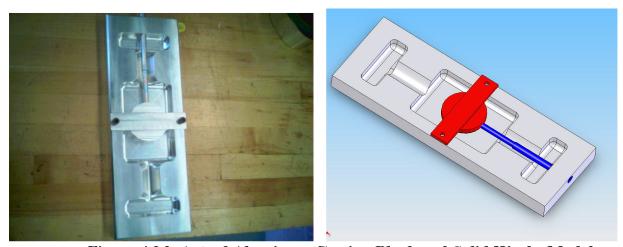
Actual Aluminum Casting Block and Solid Works Model
